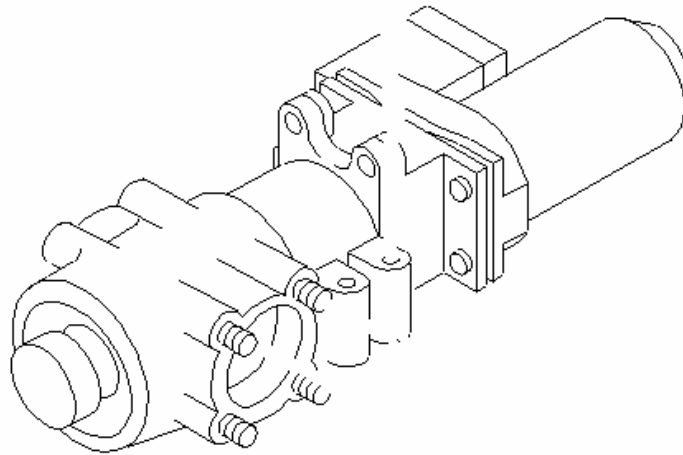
Fuel Crossfeed Valve (AH-64A/D)
